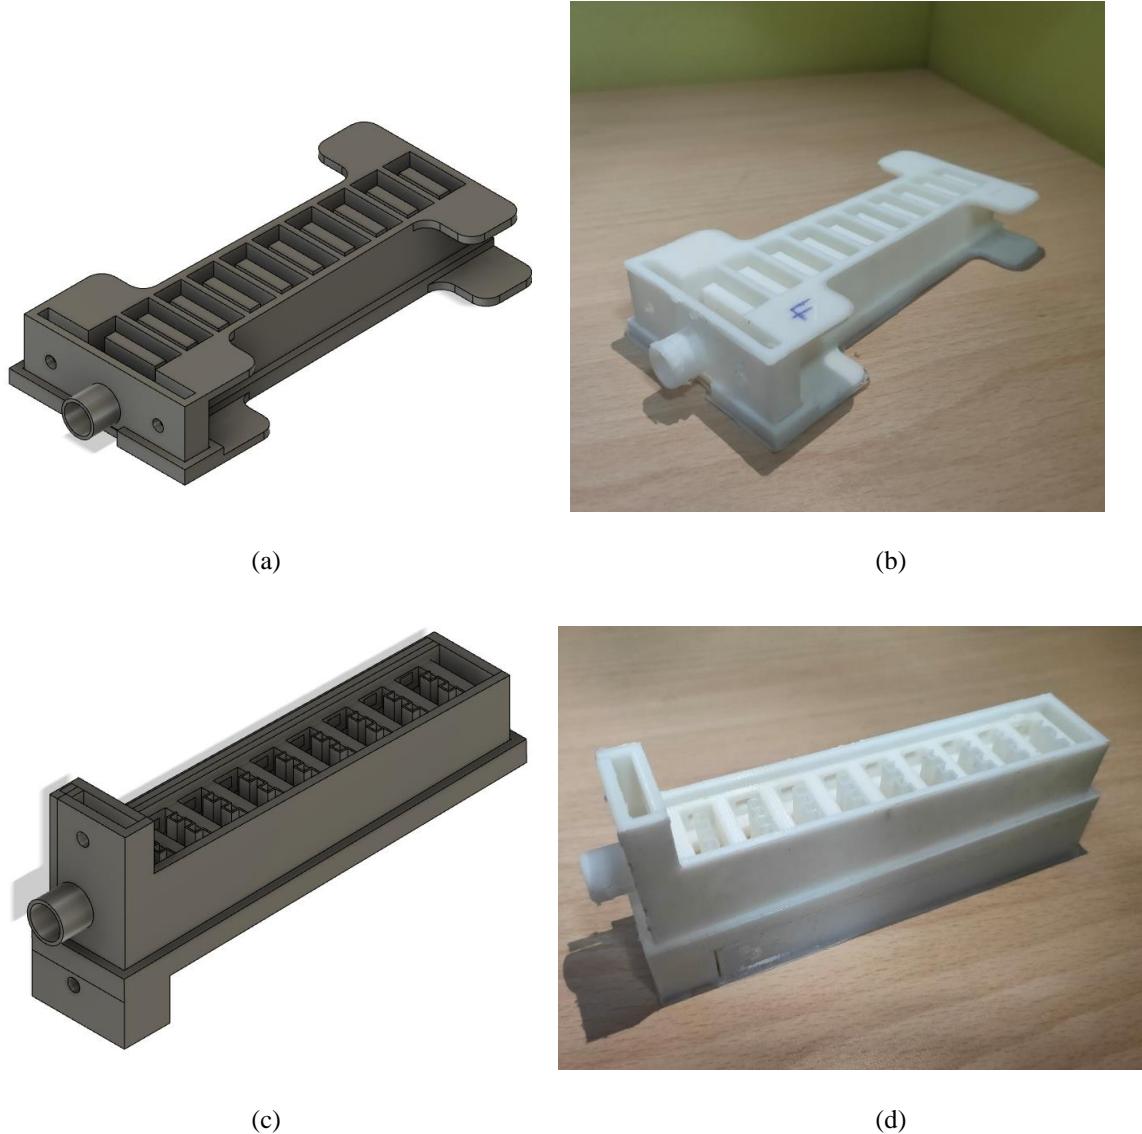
(a) CAD of Design 1 Mould (b) 3D Printed Mould of Design 1
